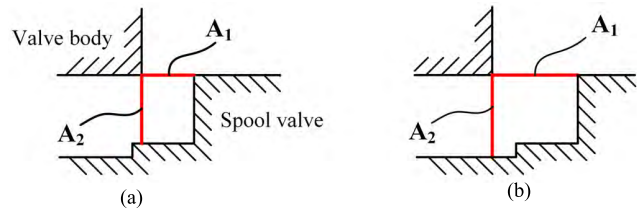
Axial section of two-step throttle. (a) Opening groove. (b) Fully opened groove.
